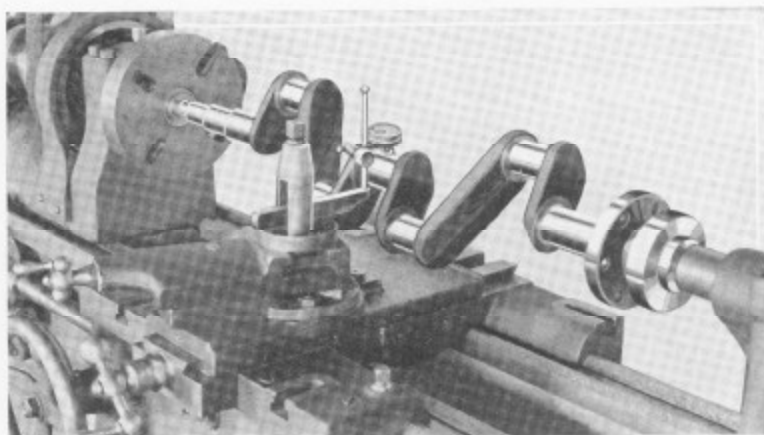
Testing a Crank Shaft in the Lathe with a Dial Test Indicator
